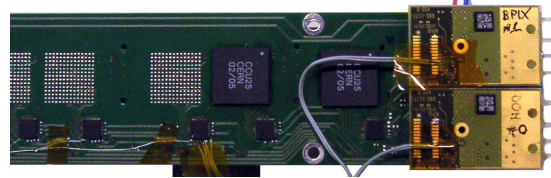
Section of the CCU board with the two installed digital opto-hybrids. Note that the test setup board is equipped with only two CCU chips.
